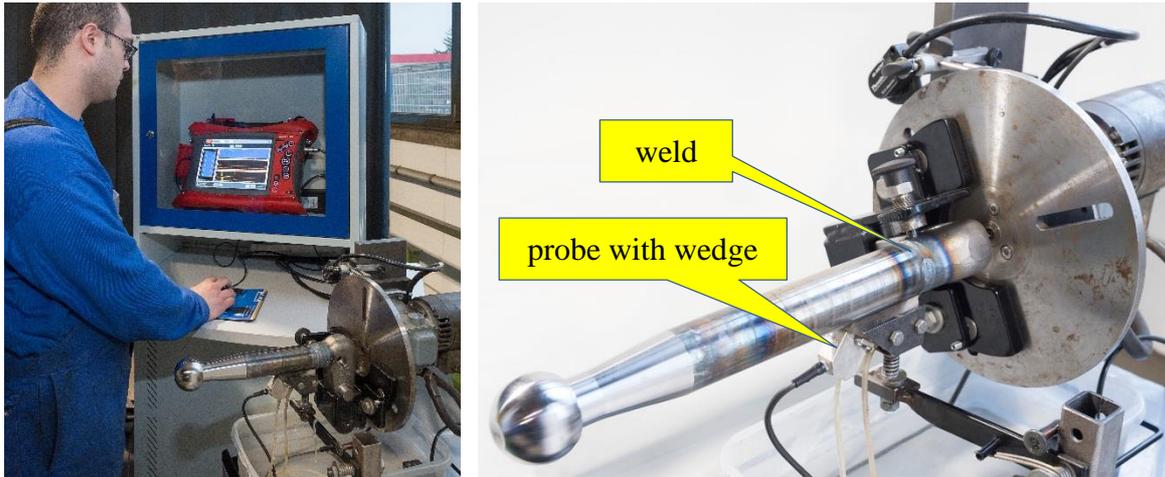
Test setup for the weld inspection on tow-bars
